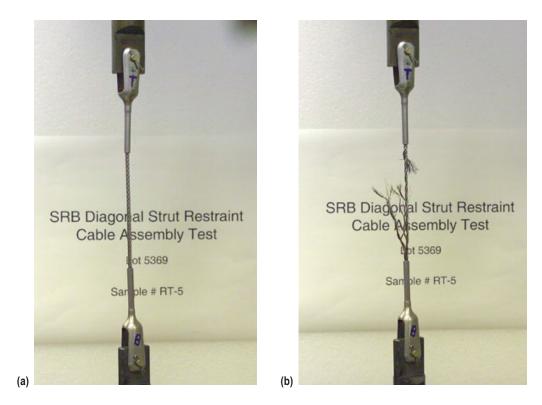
5369–RT–5 (a) before testing and (b) after testing.
